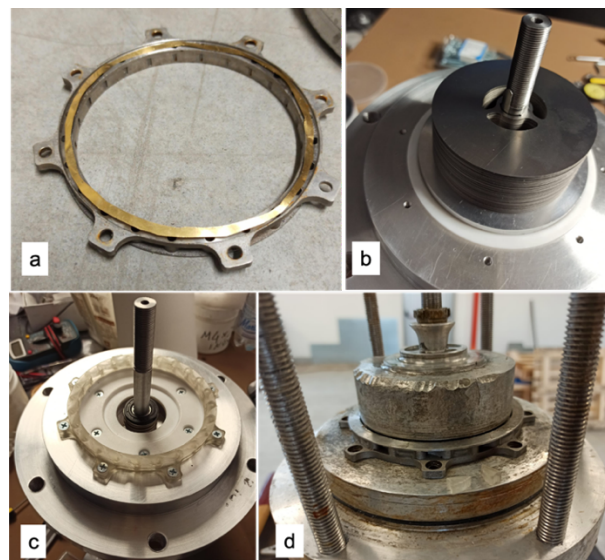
Water Tesla expander components: (a) metallic stator, (b) rotor assembly, (c) rotor with plastic stator, (d) rotor with metallic stator
